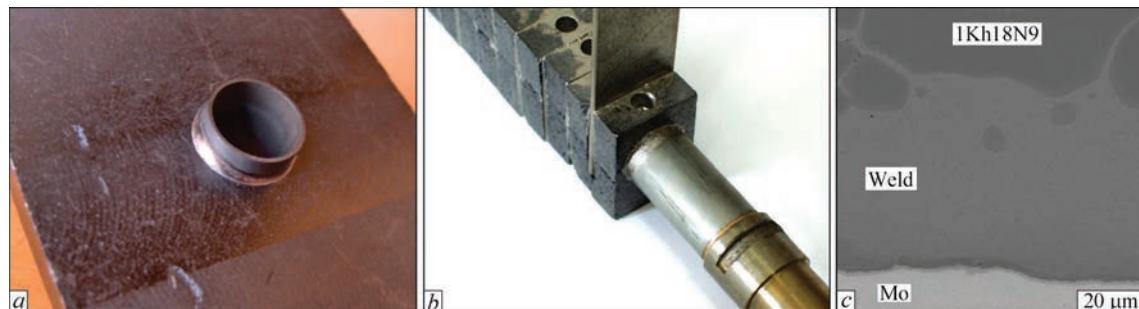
Brazed assembly graphite–molybdenum (a) and model of diverter device (b) containing brazed elements Mo–C (stainless steel) produced by vacuum high-temperature brazing for thermocyclic tests; microstructure of brazed joint molybdenum–stainless steel (c)
